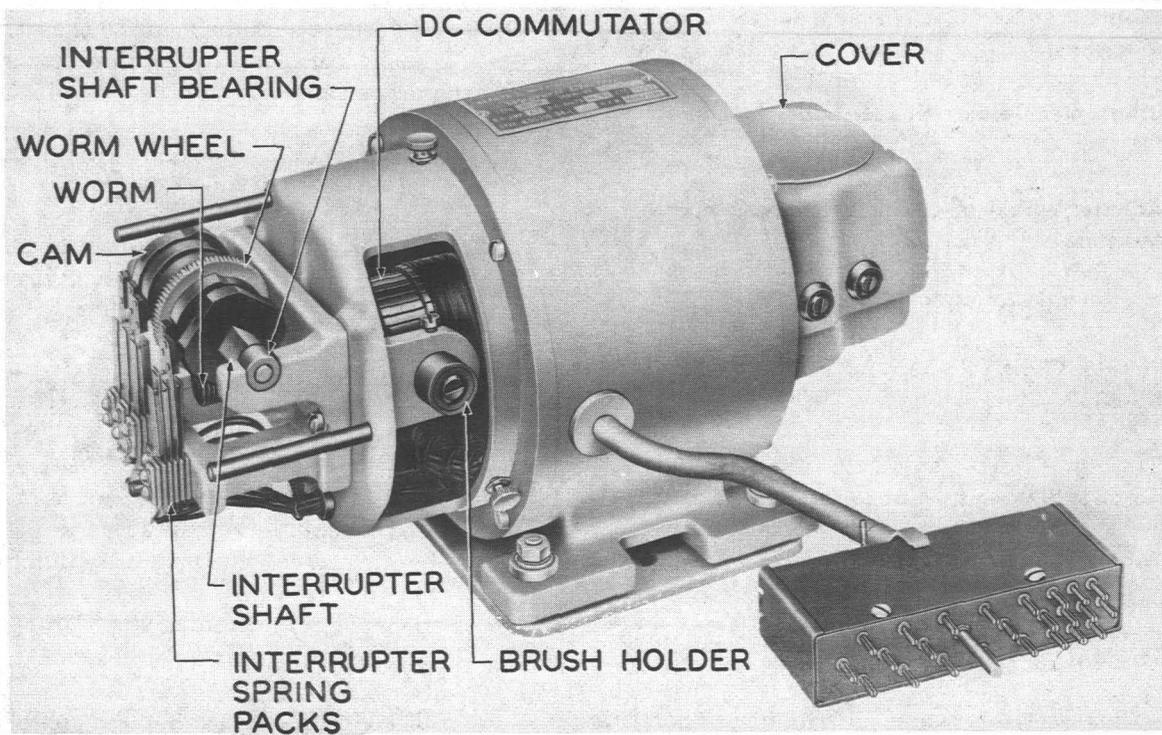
Assembly (Electric Specialty Company, KS-5319-04)
